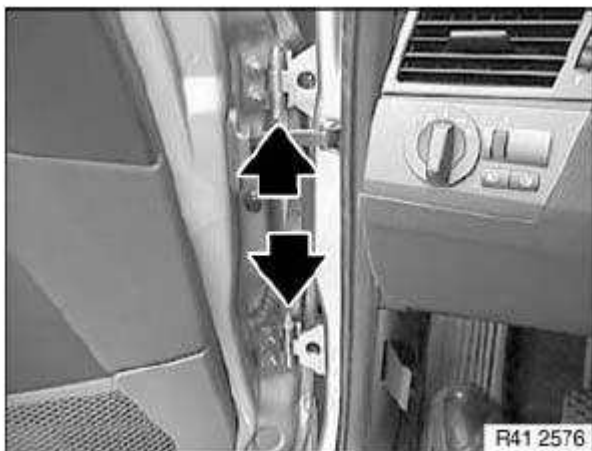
Locating Screws Between Both Hinge Elements At Top And Bottom
